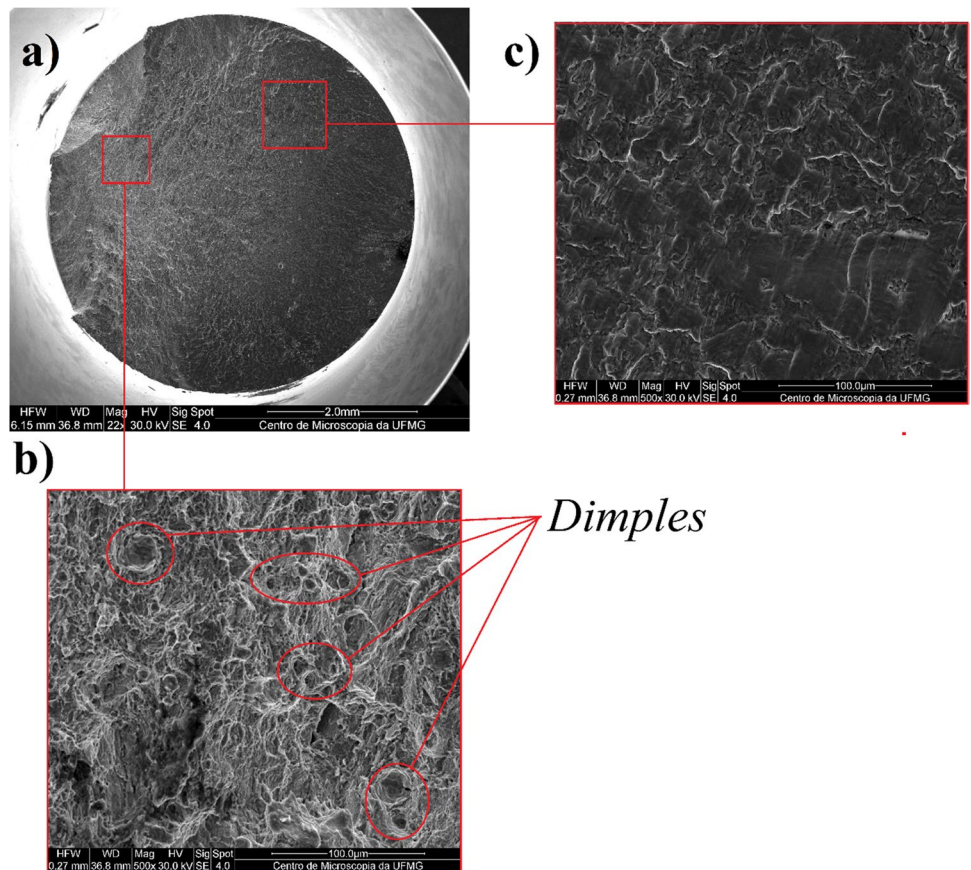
Fatigue fractures for distinct manufacturing conditions (deep rolling at $f_r=0.06$ mm/rev and $P=15$ MPa)
